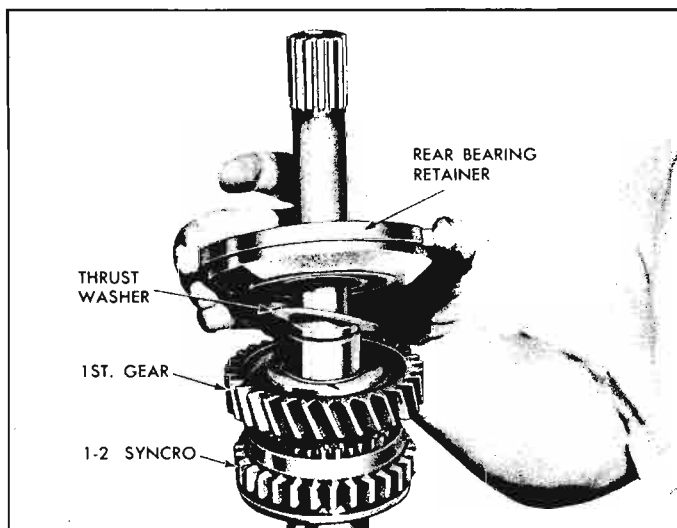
D-44—Installing 1-2 Synchronizer, First Gear, and Rear Bearing Retainer on Mainshaft
